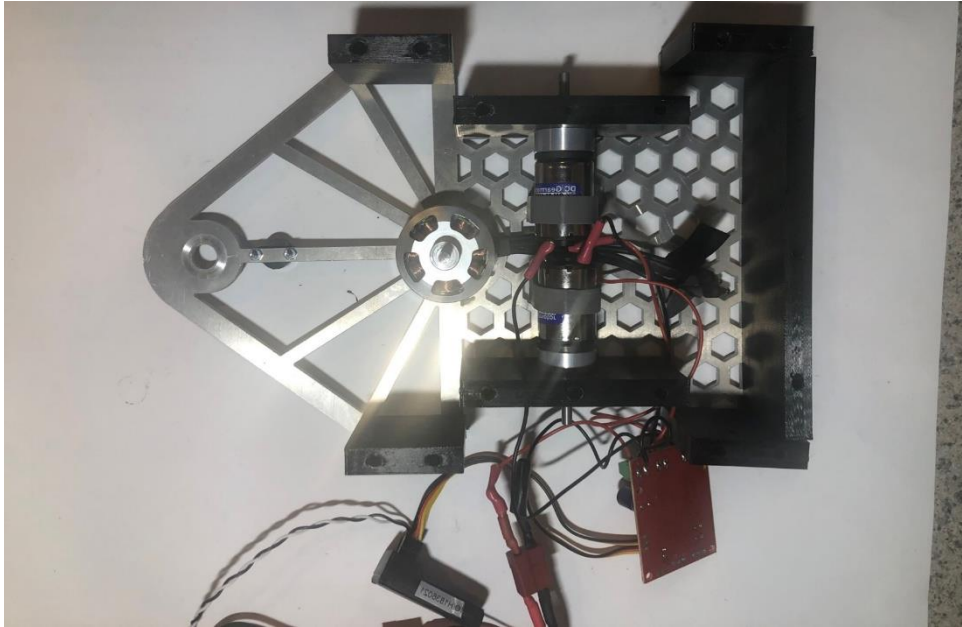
Additions: (2) 22MM DC Gearmotor & Motor Mounts
